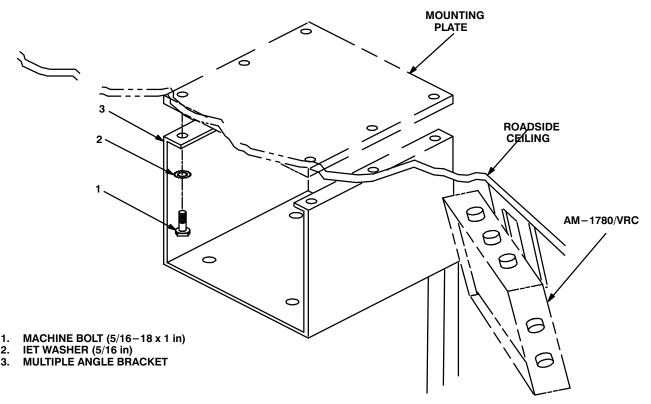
(1). Mounting Base Installation: Installing Multiple Angle Bracket
